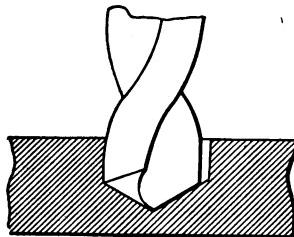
How a twist drill produces a larger hole than its diameter when it is improperly ground
